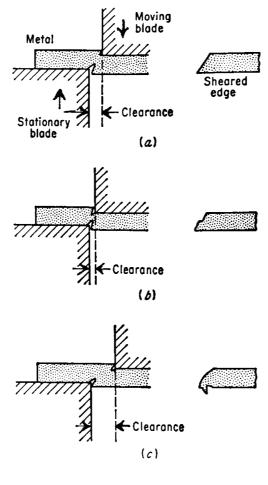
Shearing of metal; (a) proper clearance, (b) insufficient clearance, (c) excessive clearance.
